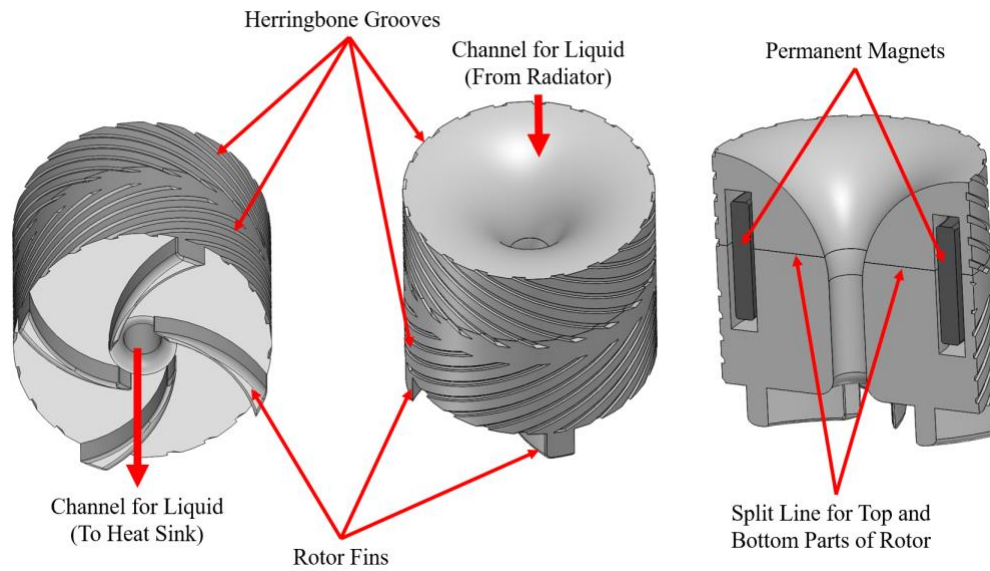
Overview of the rotor design highlighting herringbone groove stability design features, rotor fins, and coolant flow direction through the shaftless rotor.
